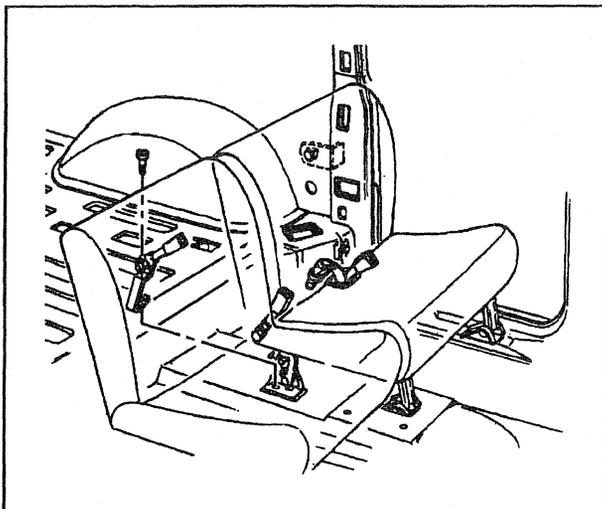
Rear Seat Belts (Suburban with Removable Folding Rear Seat)
